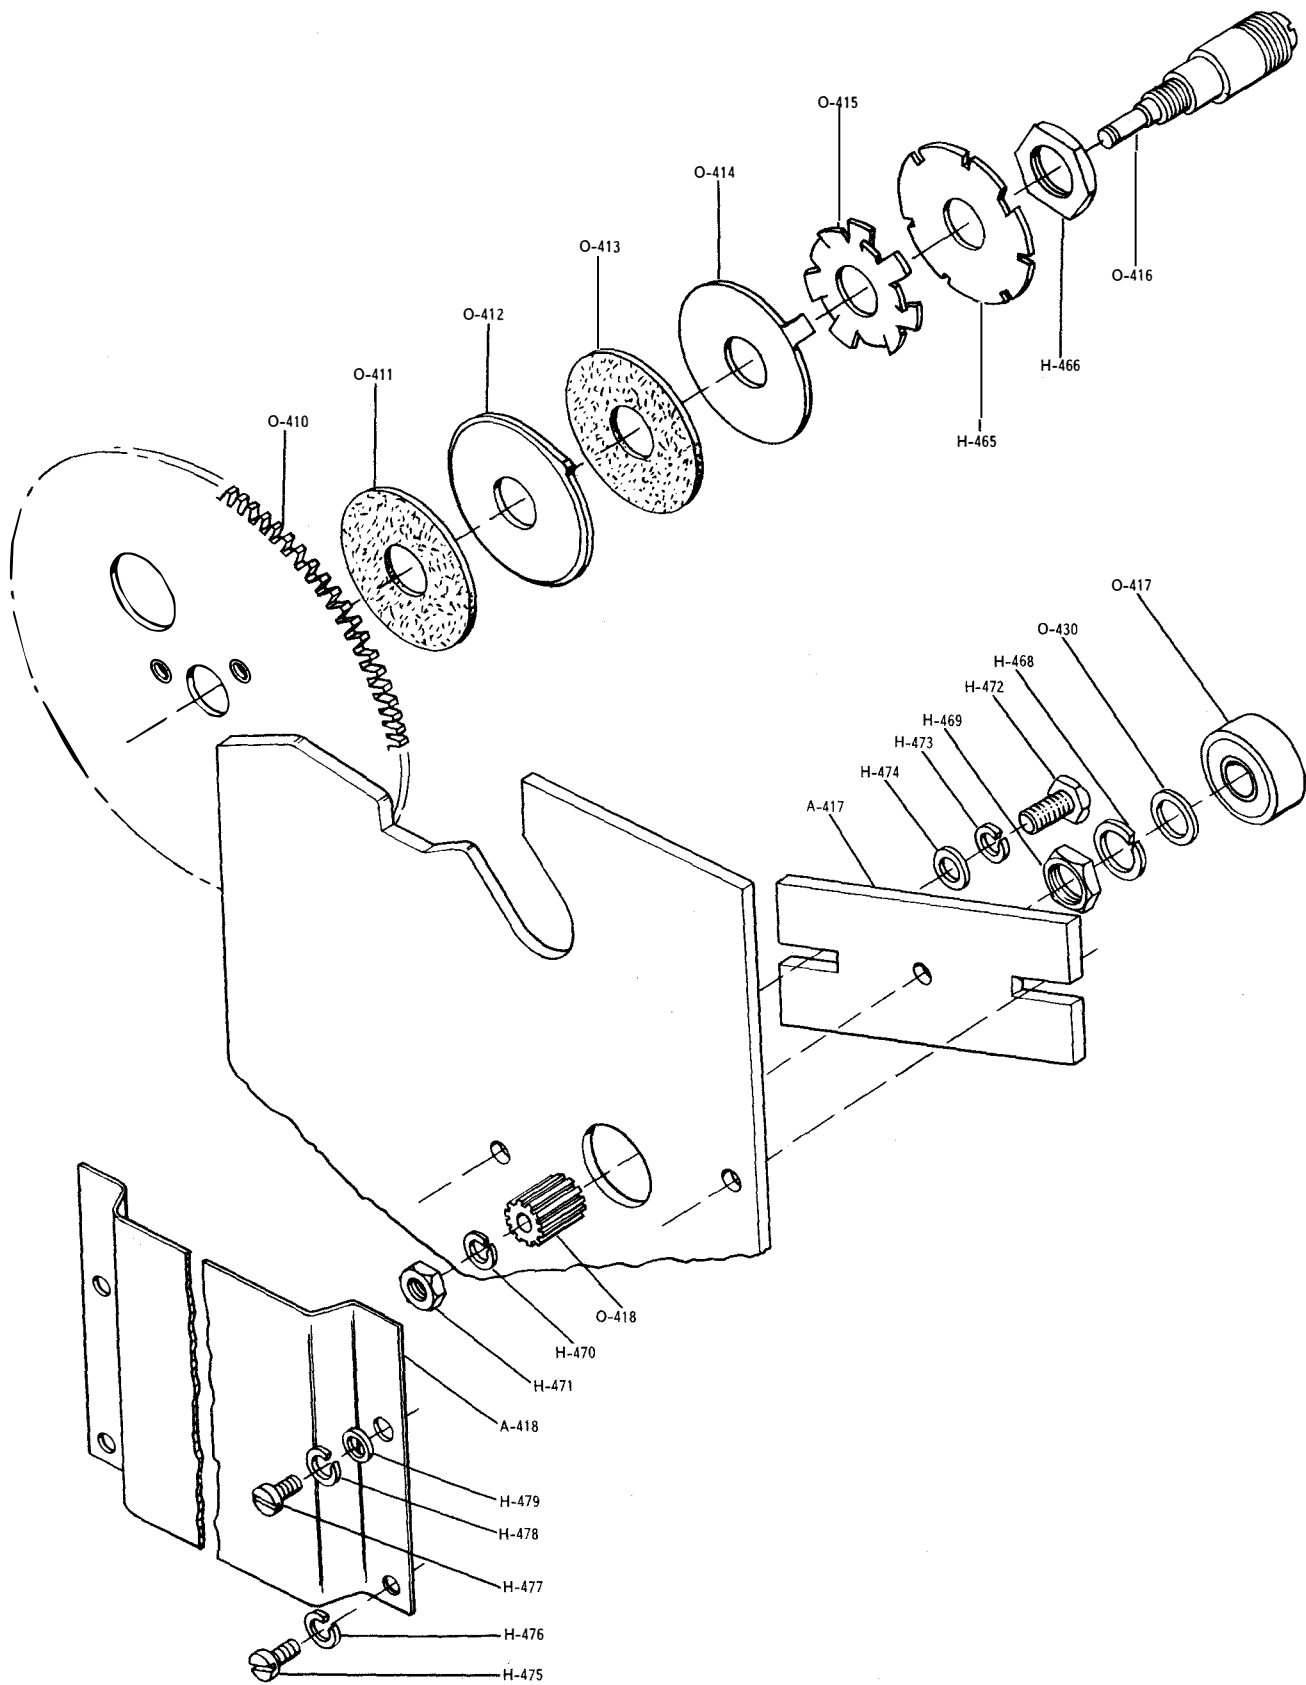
Reeling Machine RL-173/FGC, Intermediate Gear and Clutch Assembly
